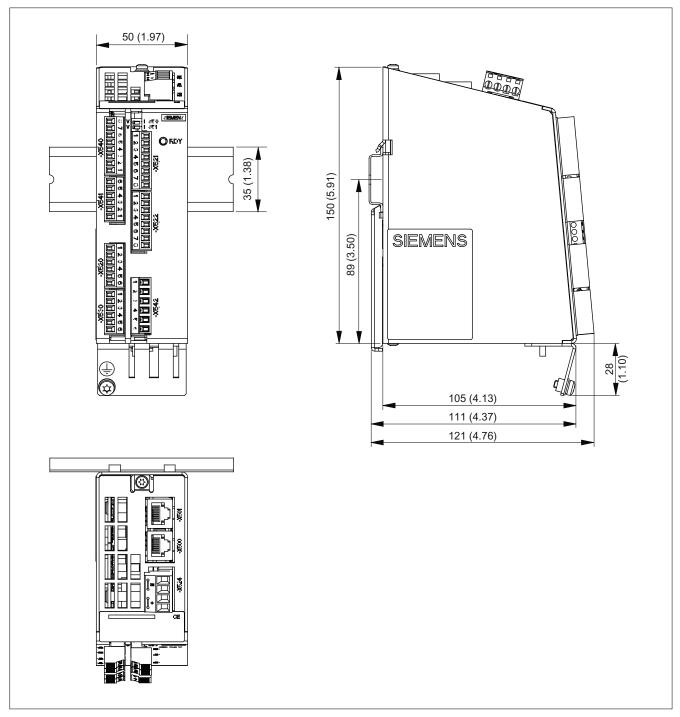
Dimension drawing of Terminal Module TM31, all data in mm and (inches)
